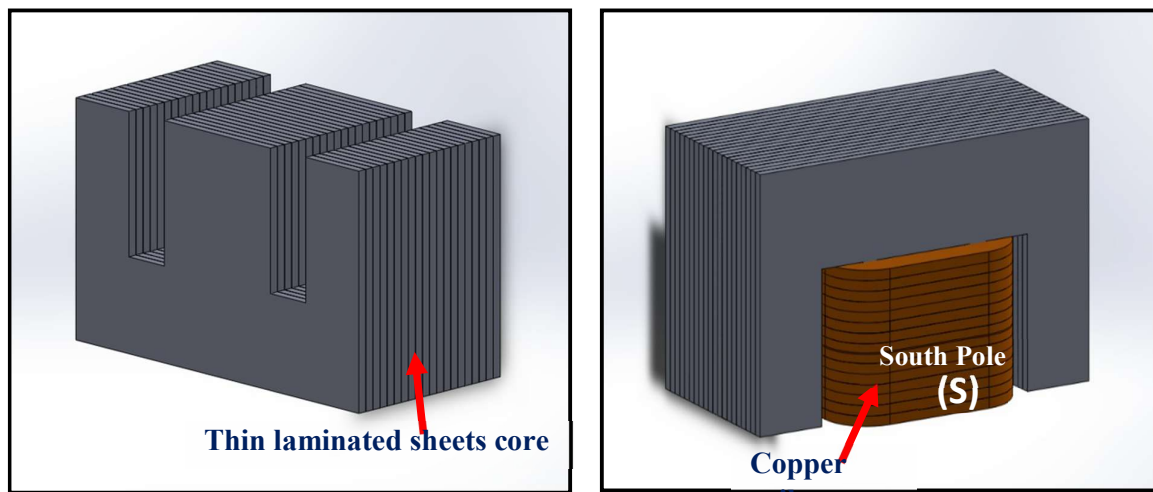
E- Shape electromagnet with (a) core composed of laminated sheets (b) coil wrapped on core.
